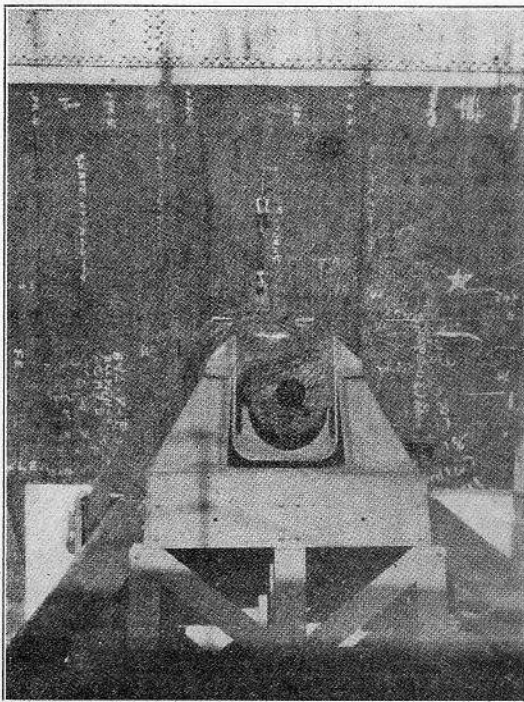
Sagging Test. Broadside View of Forward Shaft Pendulum Support.
